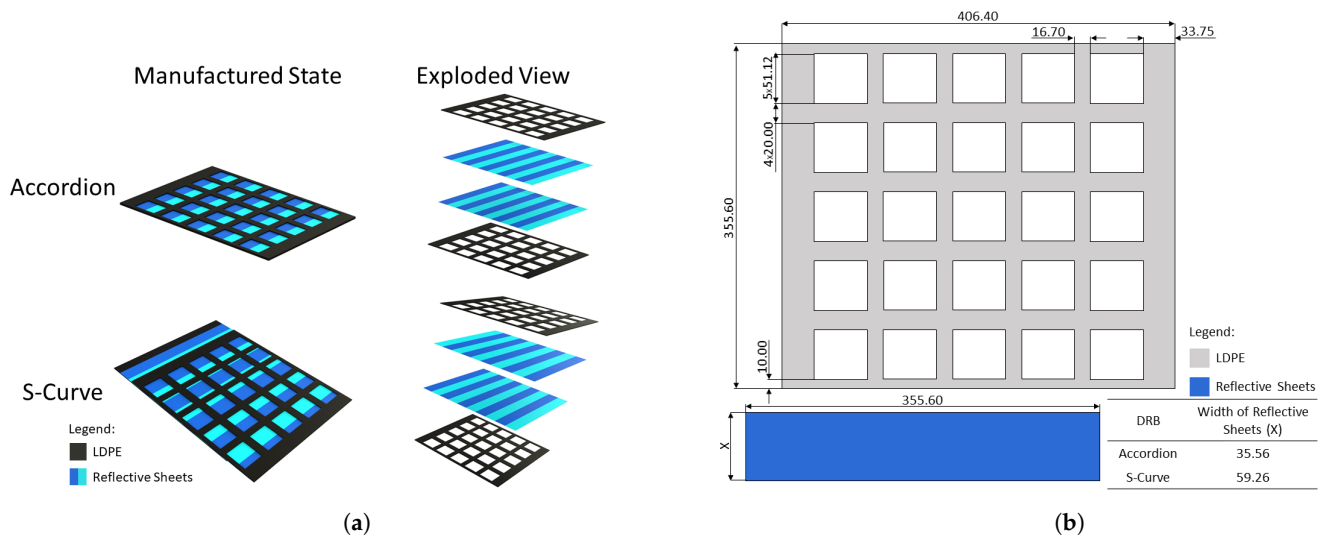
(a) Manufactured and exploded views of Accordion and S-Curve DRBs. Black represents the LDPE, while blue and teal are used to differentiate the segments formed by cutting each reflective sheet. (b) Dimensions for LDPE and aluminum components, with units in mm.
